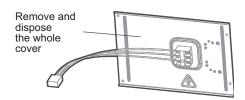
Remove and Dispose of Whole Cover Step 6 - Turn the handles in the auxiliary Heater
